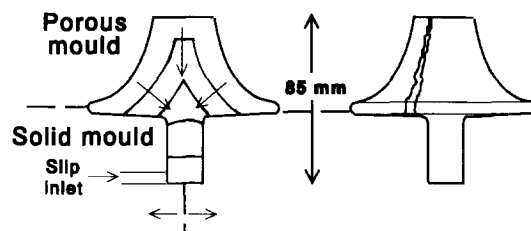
Description of the spin test disc mould and illustration of the consolidation progress during casting. To the right a radial crack is illustrated.
